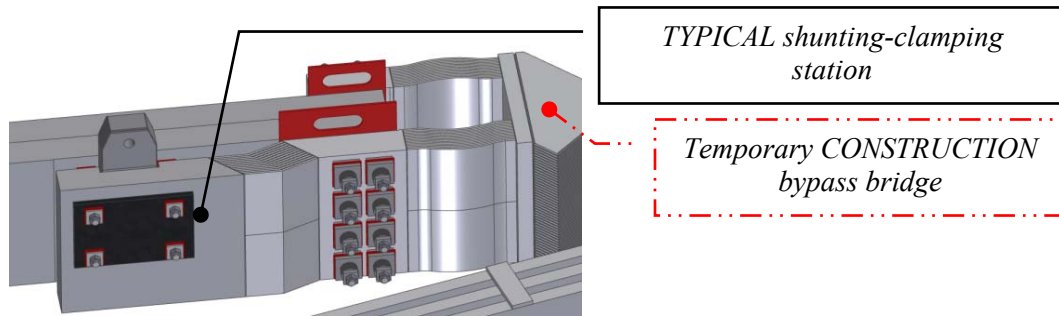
Construction bridge was designed to keep design current distribution between anode risers.
